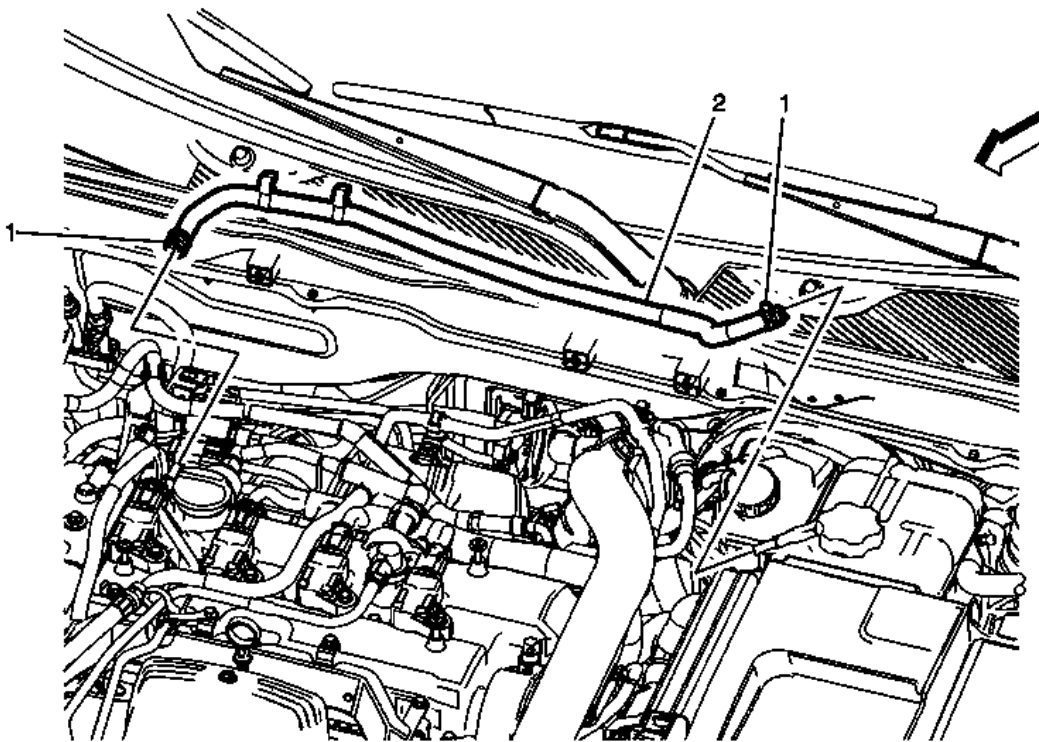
Radiator Surge Tank Inlet Hose (LTG)
